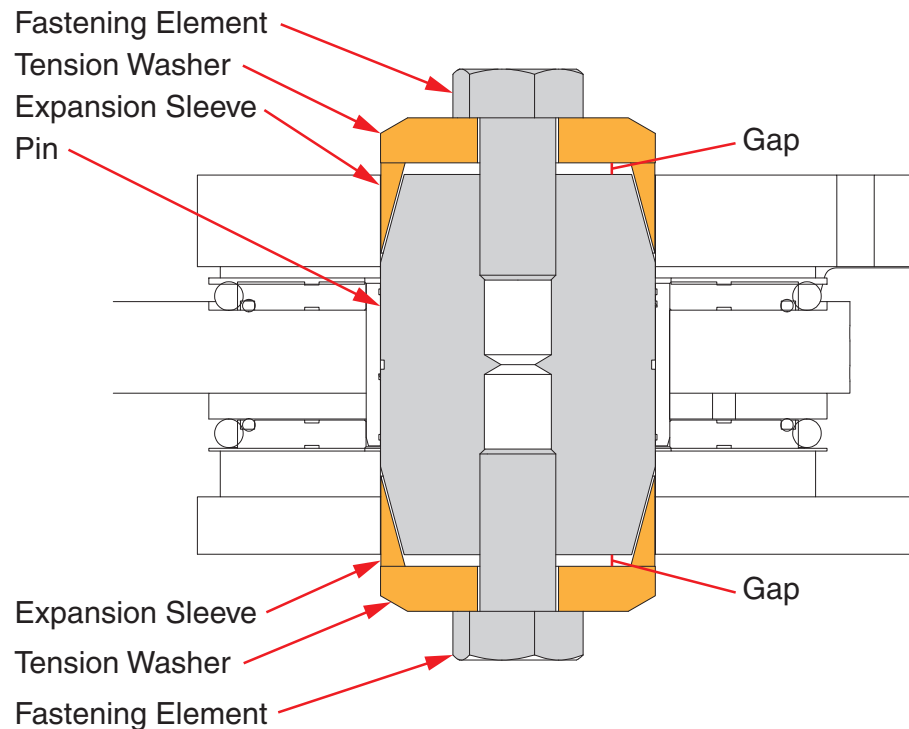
Expander Pin System (Center Hinge Pivot Pin)
